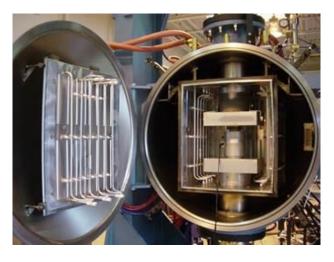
Vacuum furnace diffusion welding equipment [12]
